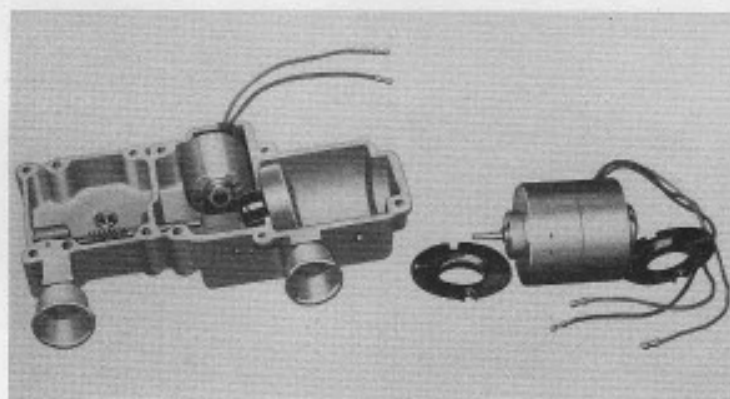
Electric motor removed and flexible coupling partly removed from casing.
